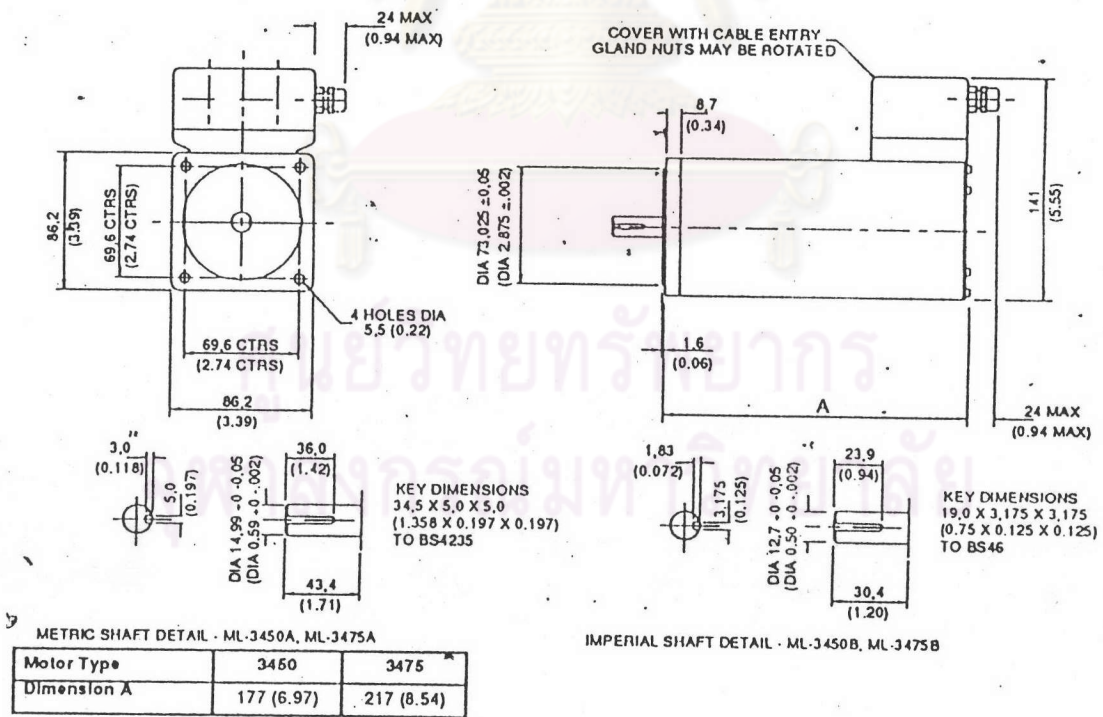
Motor Type ML-3450 & ML-3475 Dimensions
